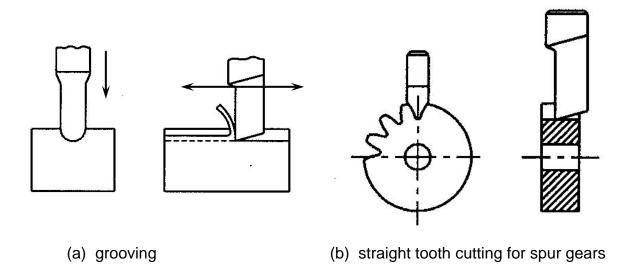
Making grooves and gear teeth cutting in shaping machine by form tools.
